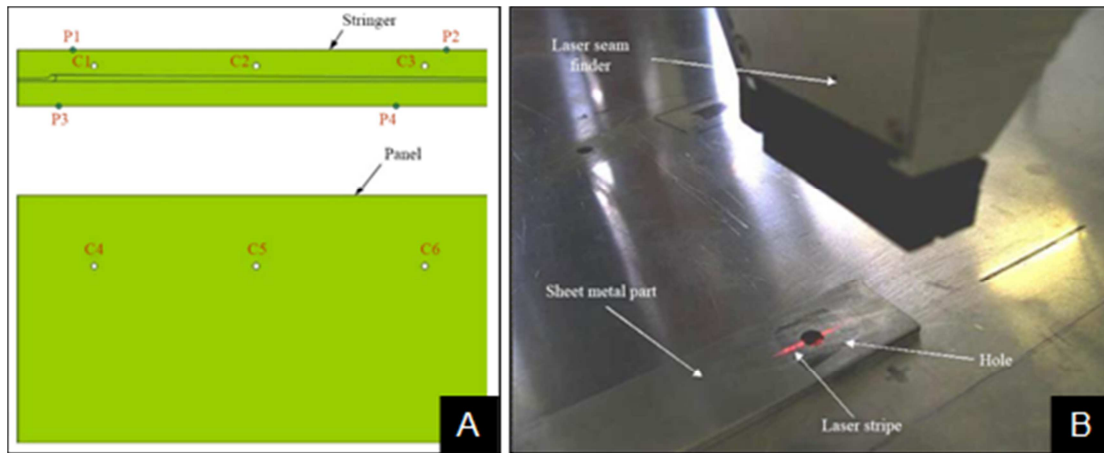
A) Panel and stringer with pre-drilled holes to be aligned. [35] B) the holes are scanned with laser scanner mounted on the robot. [34]
